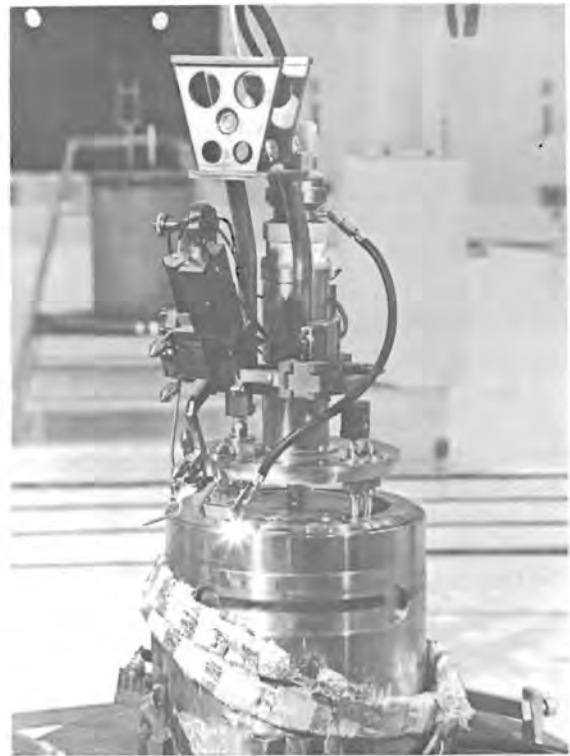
Canister Closure Lid Being Seal Welded
